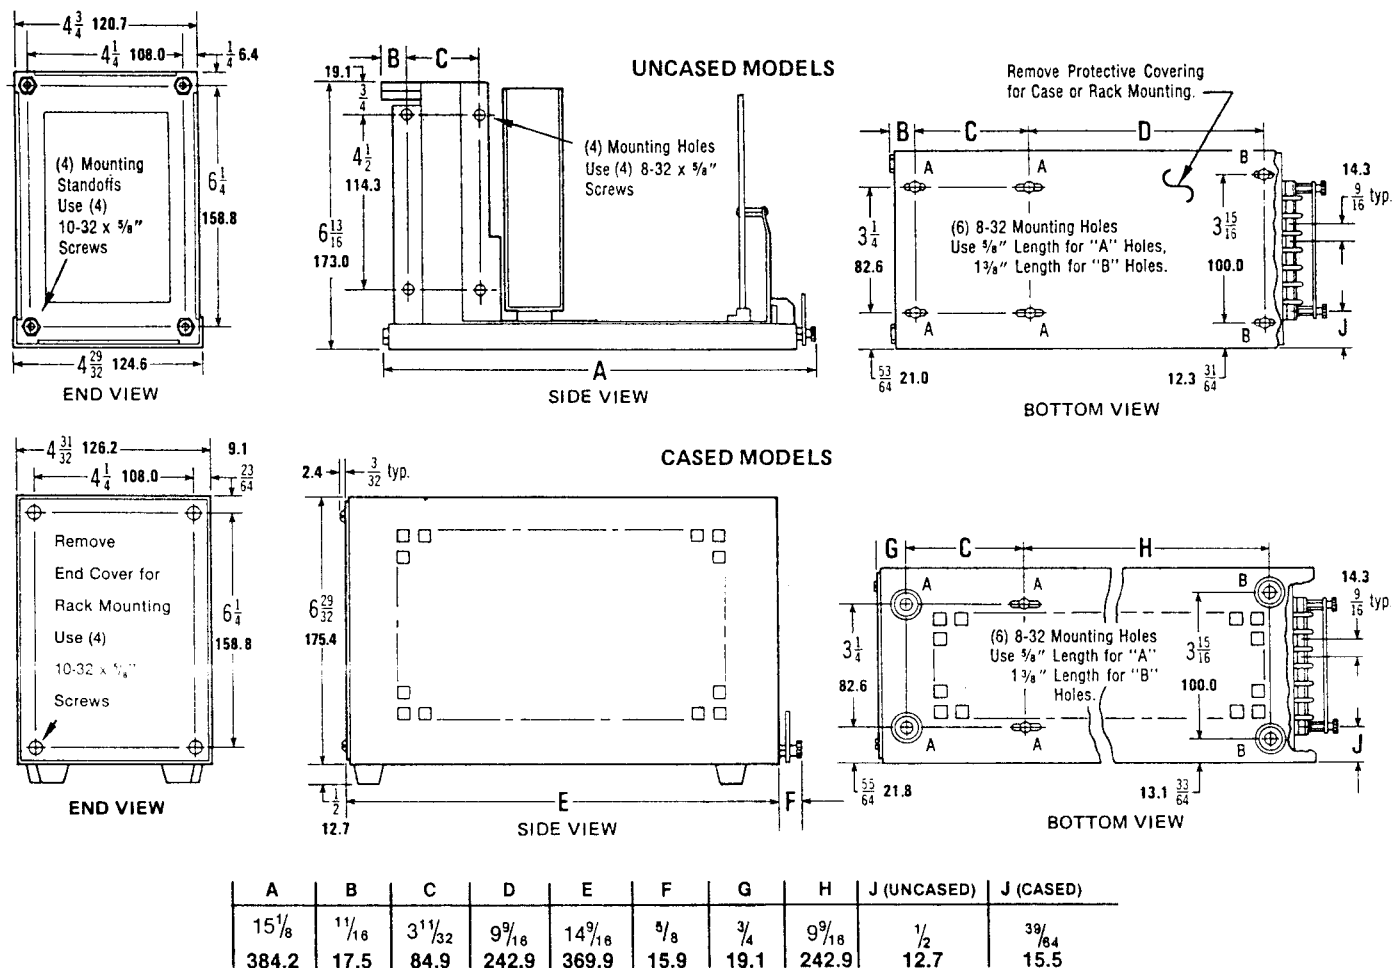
MECHANICAL OUTLINE DRAWING, PRM 300 SERIES.
